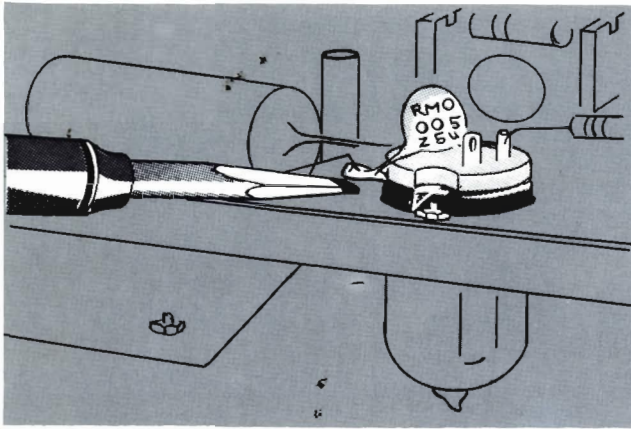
Soldering to a terminal. Note the slight fillet of solder—exaggerated for clarity—formed around the wire.
